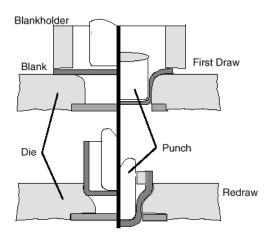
Direct Deep-Drawing of seamless tubes from circular blanks. Top picture: First drawing of a blank. Bottom picture: Redrawing of the cup into a taller one with a smaller diameter. On the left is displayed the configuration before drawing, while that on the right is during the operation.
